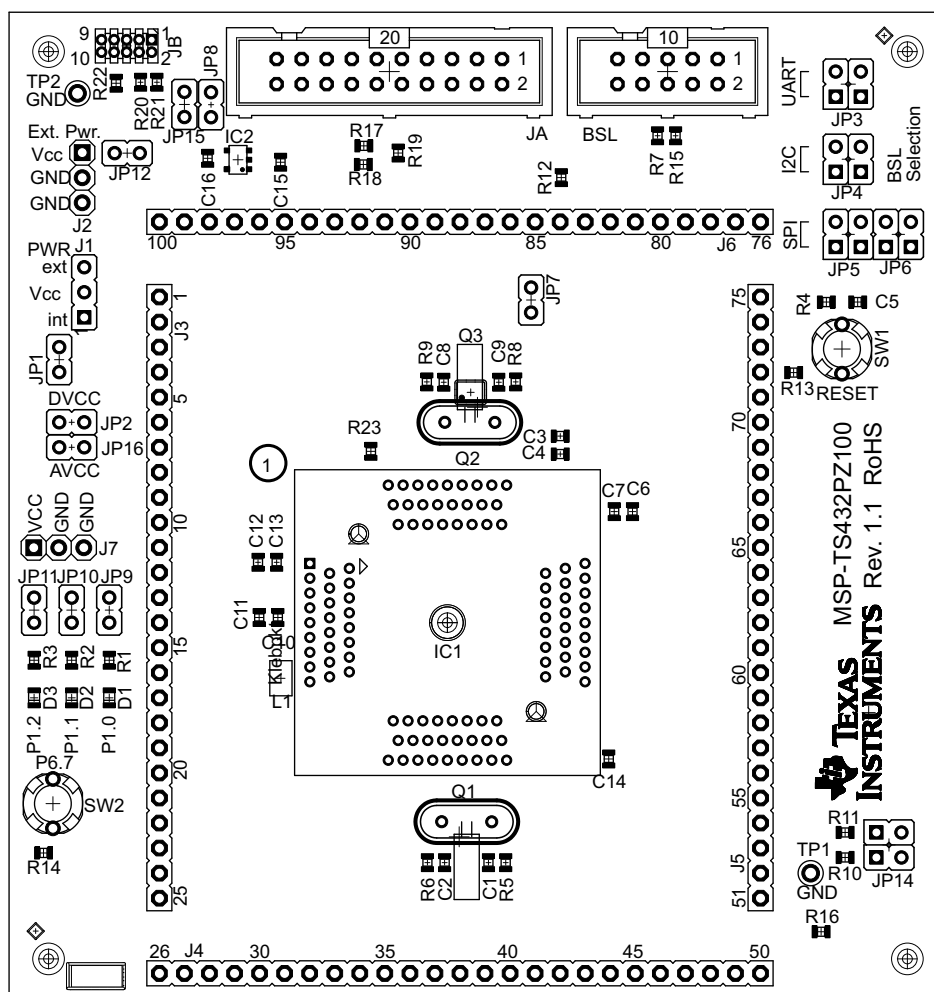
MSP-TS432PZ100 Target Socket Board, PCB
